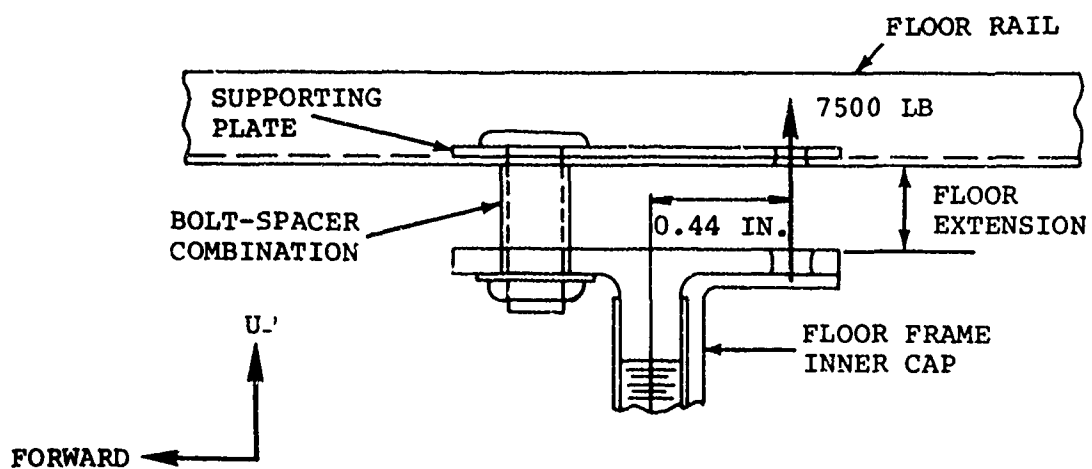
Supporting Structure Loads, Isolated Floor Rail Fully Extended Above Floor Frame, 7.5K Restraint Load Applied Vertically.
